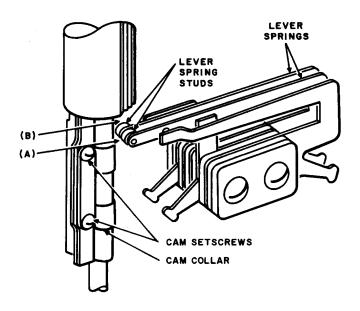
Rotary Step Lever Spring Stud Clearances with Rotary Ratchet and Cam Collar
